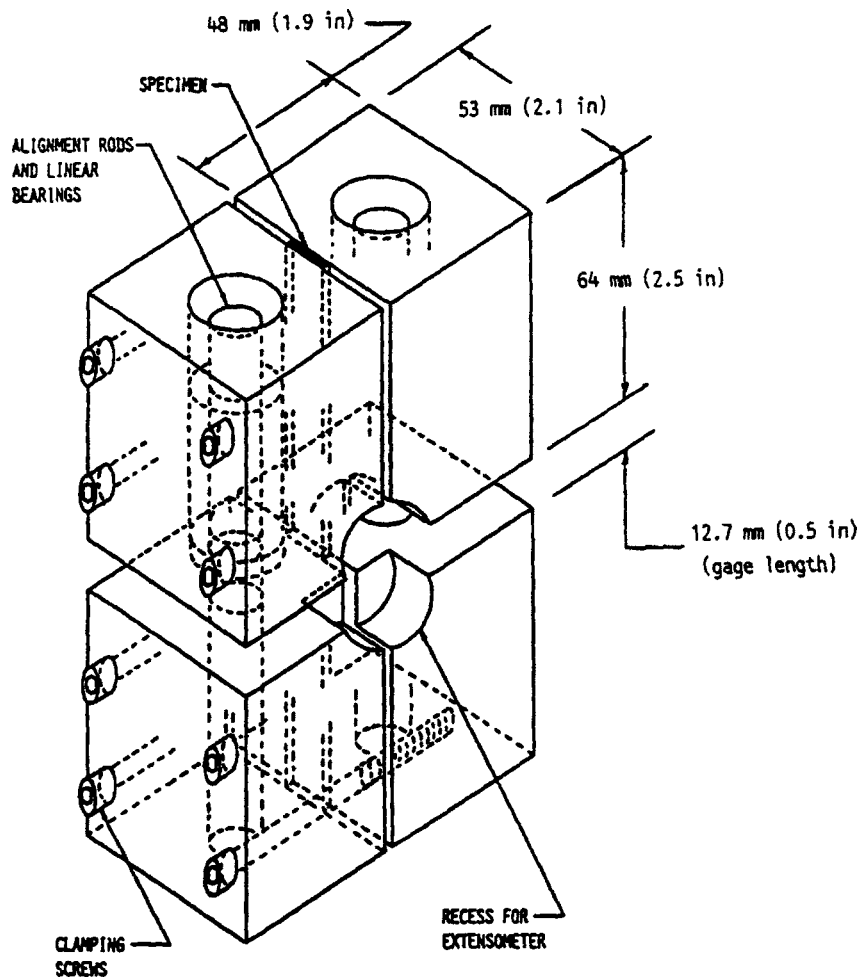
Photograph of a Typical Combined Loading Compression (CLC) Test Fixture
